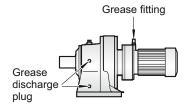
Location of Grease Fill and Discharge Port (Vertical, Gearmotor, 2-Stage)
